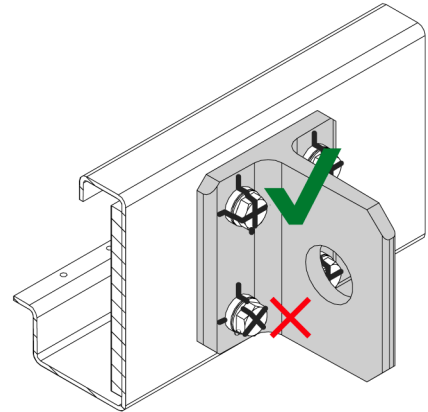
Approved lifting attachments for MEGADRIVE-LCI equipment
